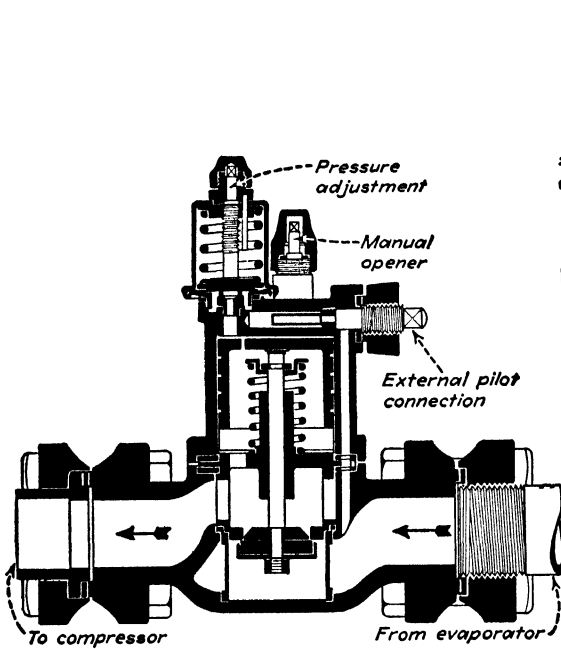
Valve holds predetermined back pressure on refrigerating evaporator. (Courtesy of Alco Valve Co.)
